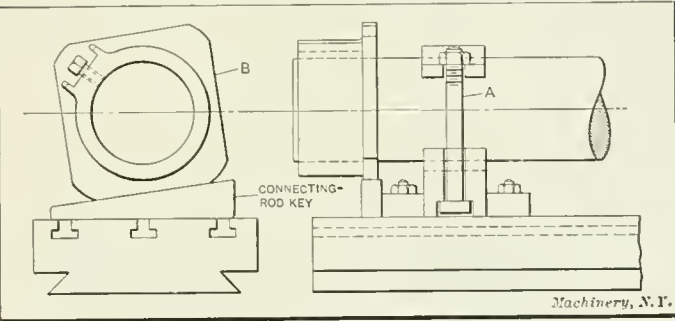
Method used in Keyseating Large Shafts on a Burr Keyseating Miller
